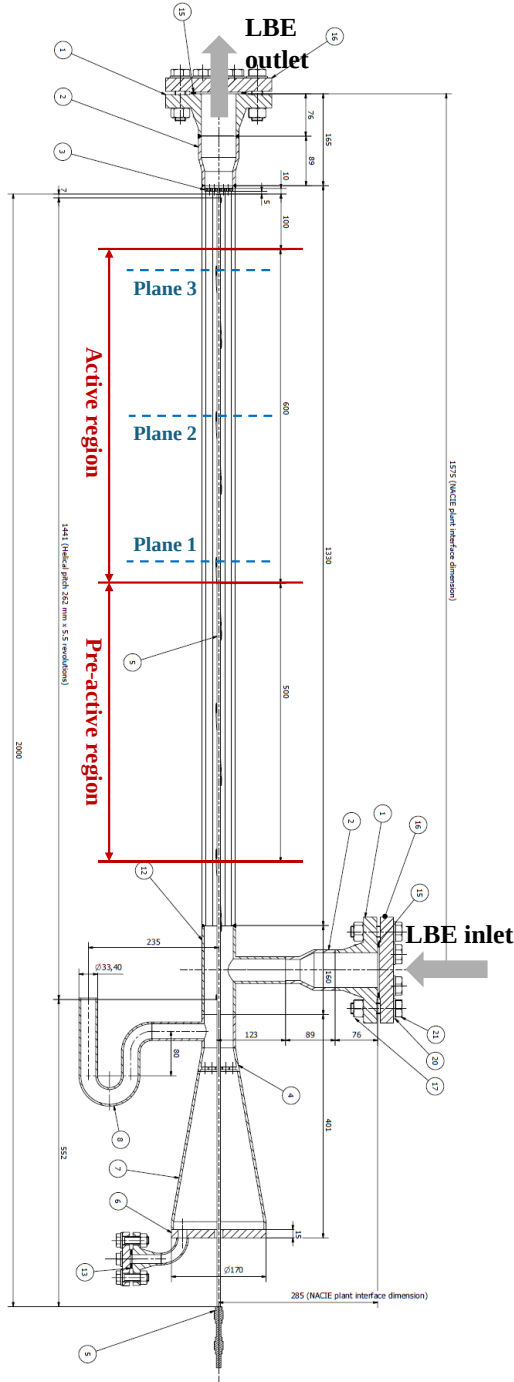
NACIE-UP FPBS layout and instrumented planes
